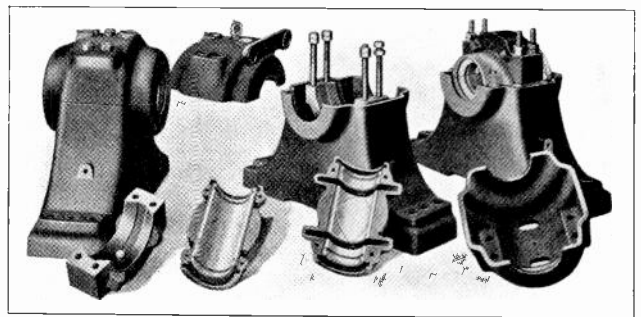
Pedestal type sleeve bearings, showing parts of one bearing and housing disassembled.
